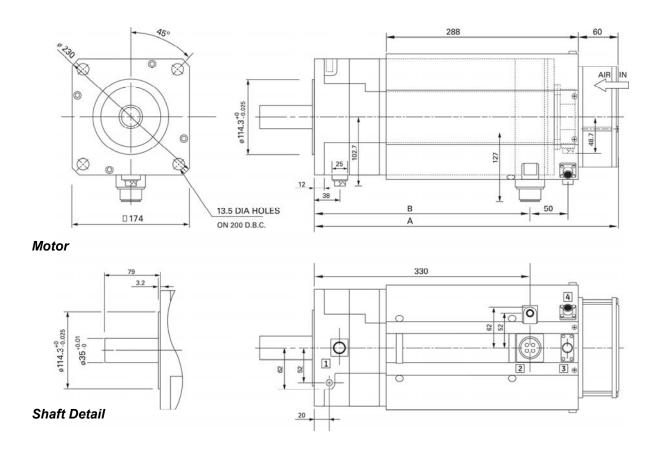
α12/4000HVis Series Servo Motor Outline Drawing
